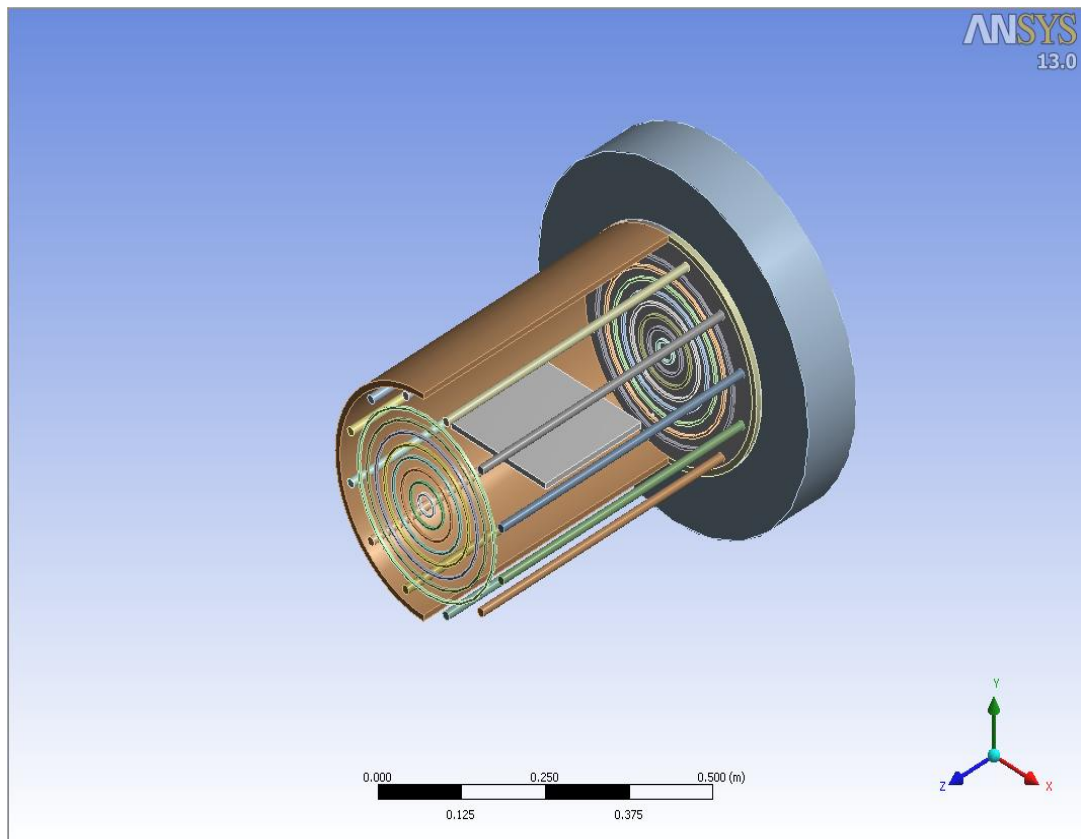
Parts of the Quartz Tube Hidden from View to Reveal the Heated Enclosure
